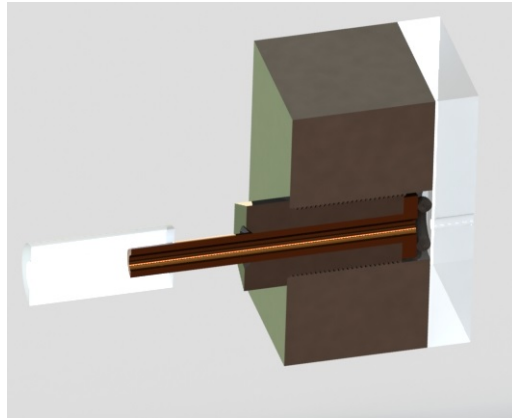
Connector: Axial Sealing with Threaded Connection.
